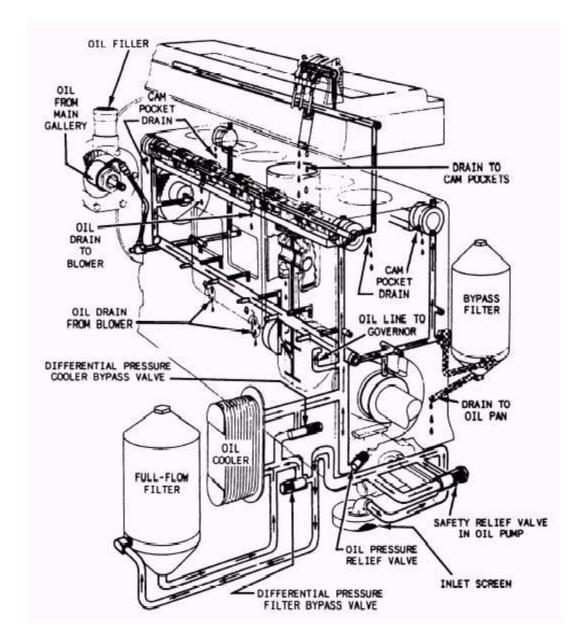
Schematic diagram of a typical lubricating oil system in a General Motors series 71 in line diesel engine.
